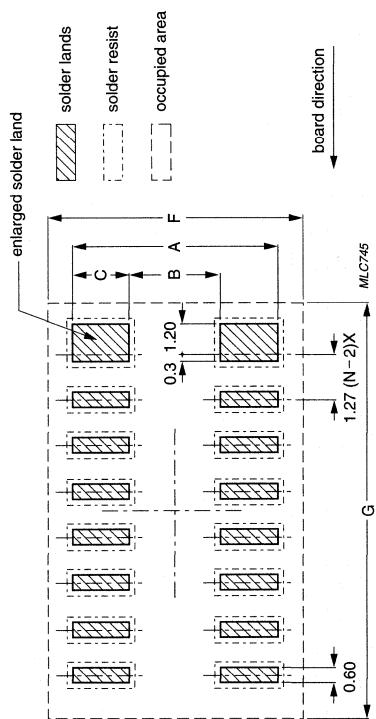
PC board footprint for mounting SO packages (wave soldering).
